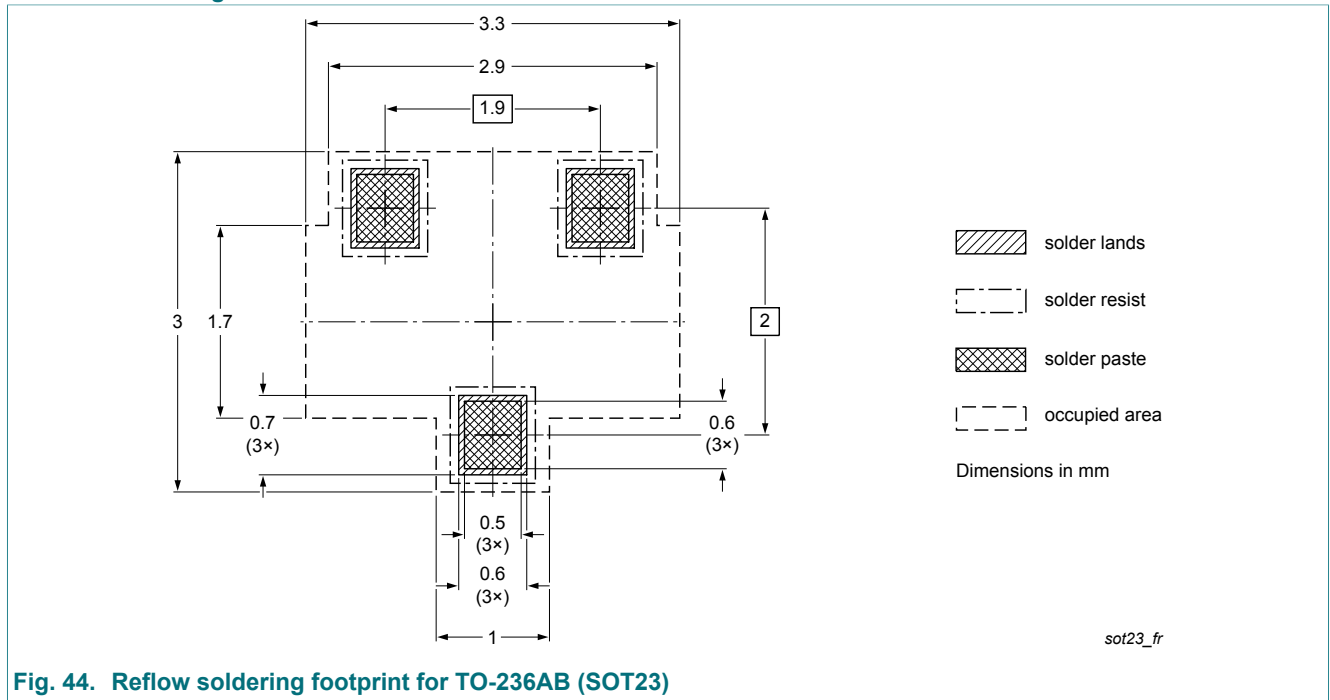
Reflow soldering footprint for TO-236AB (SOT23)
